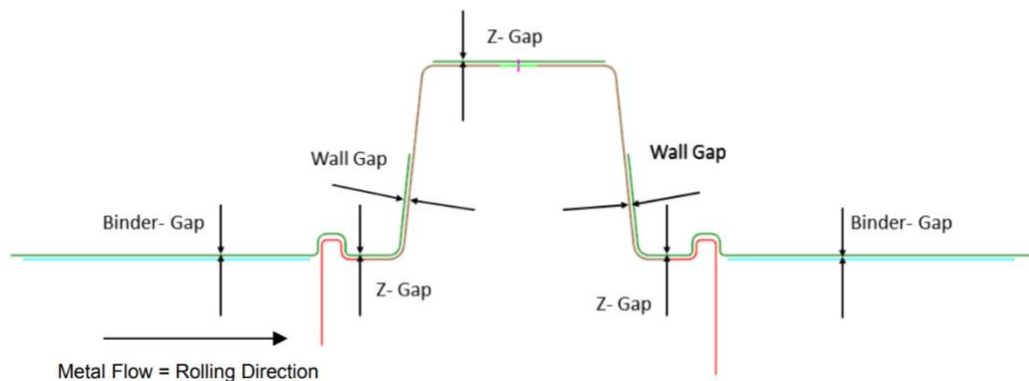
Forming Process – Blank Configuration and Gaps <sup>[1]</sup>
